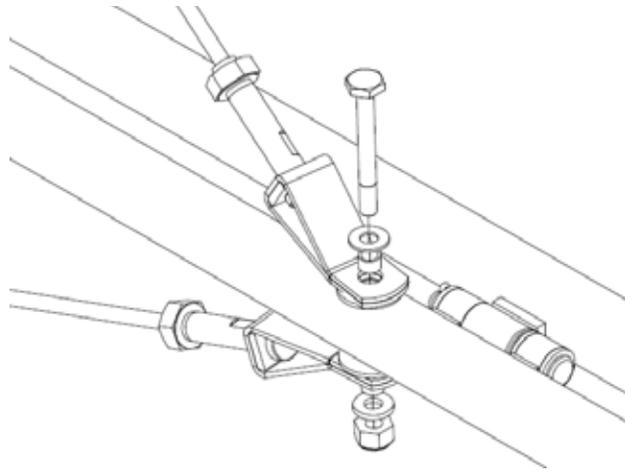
Horizontal Stabilizer Tail Brace Wire Installation
